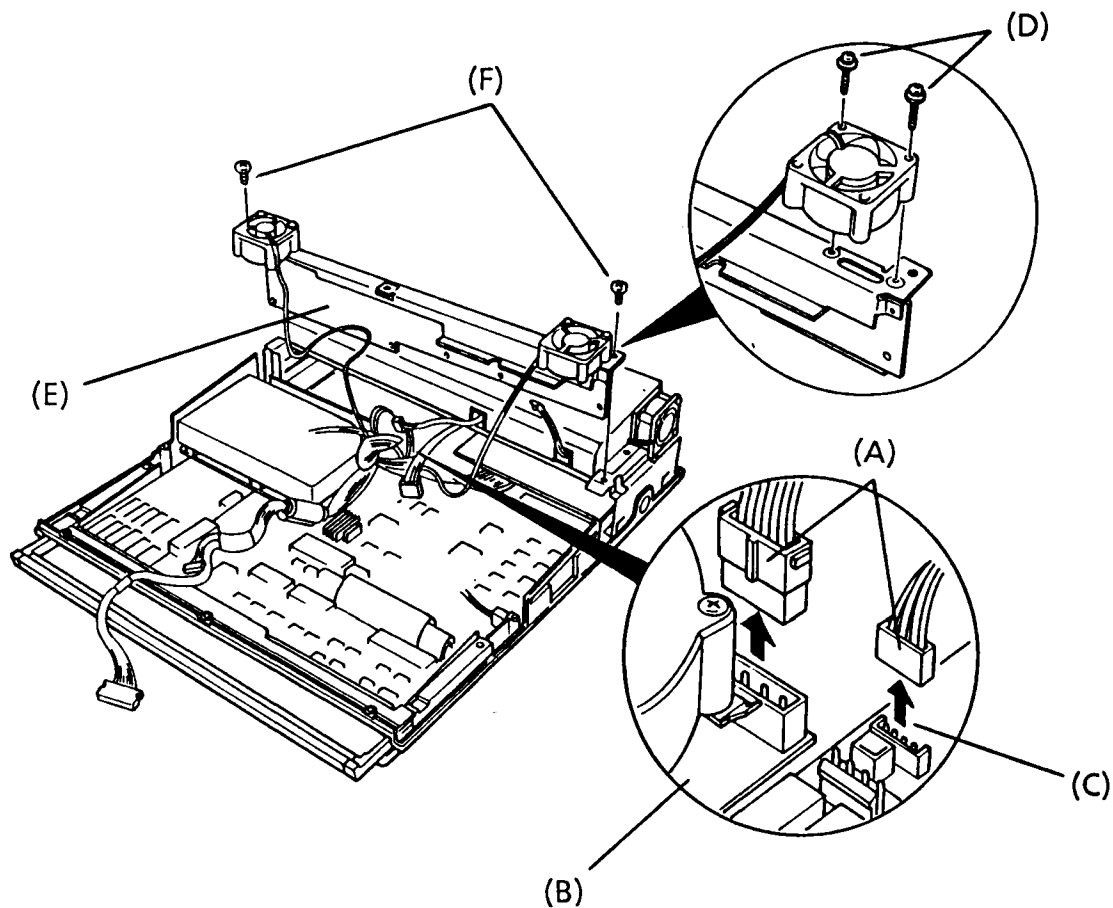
Removing the Expansion Bus PCB and the Fan
